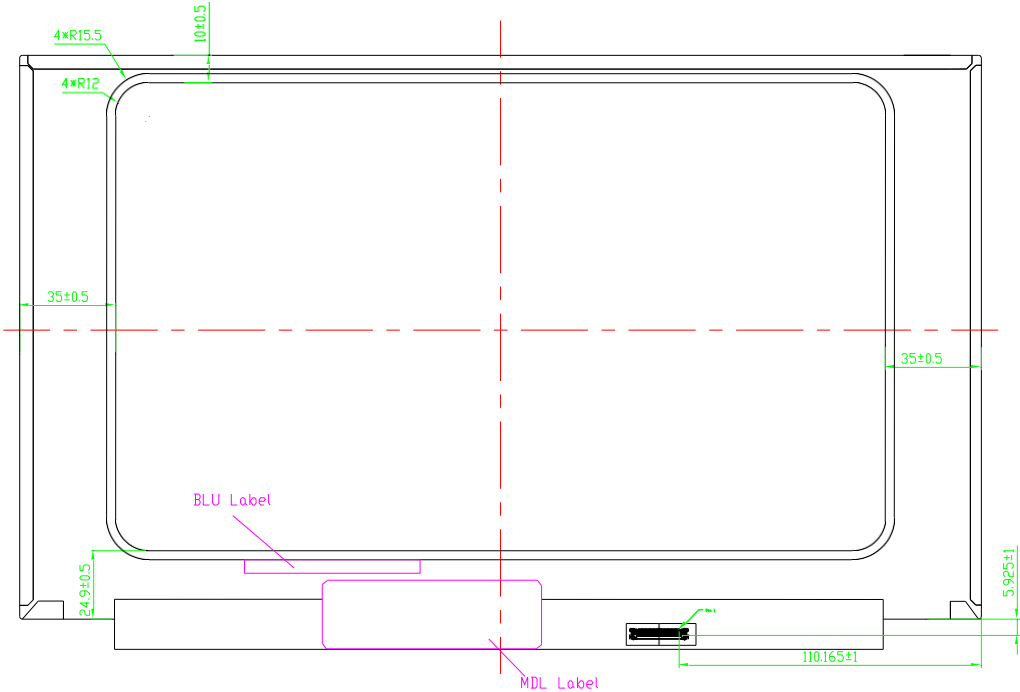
TFT-LCD Module Outline Dimension (Front View)
